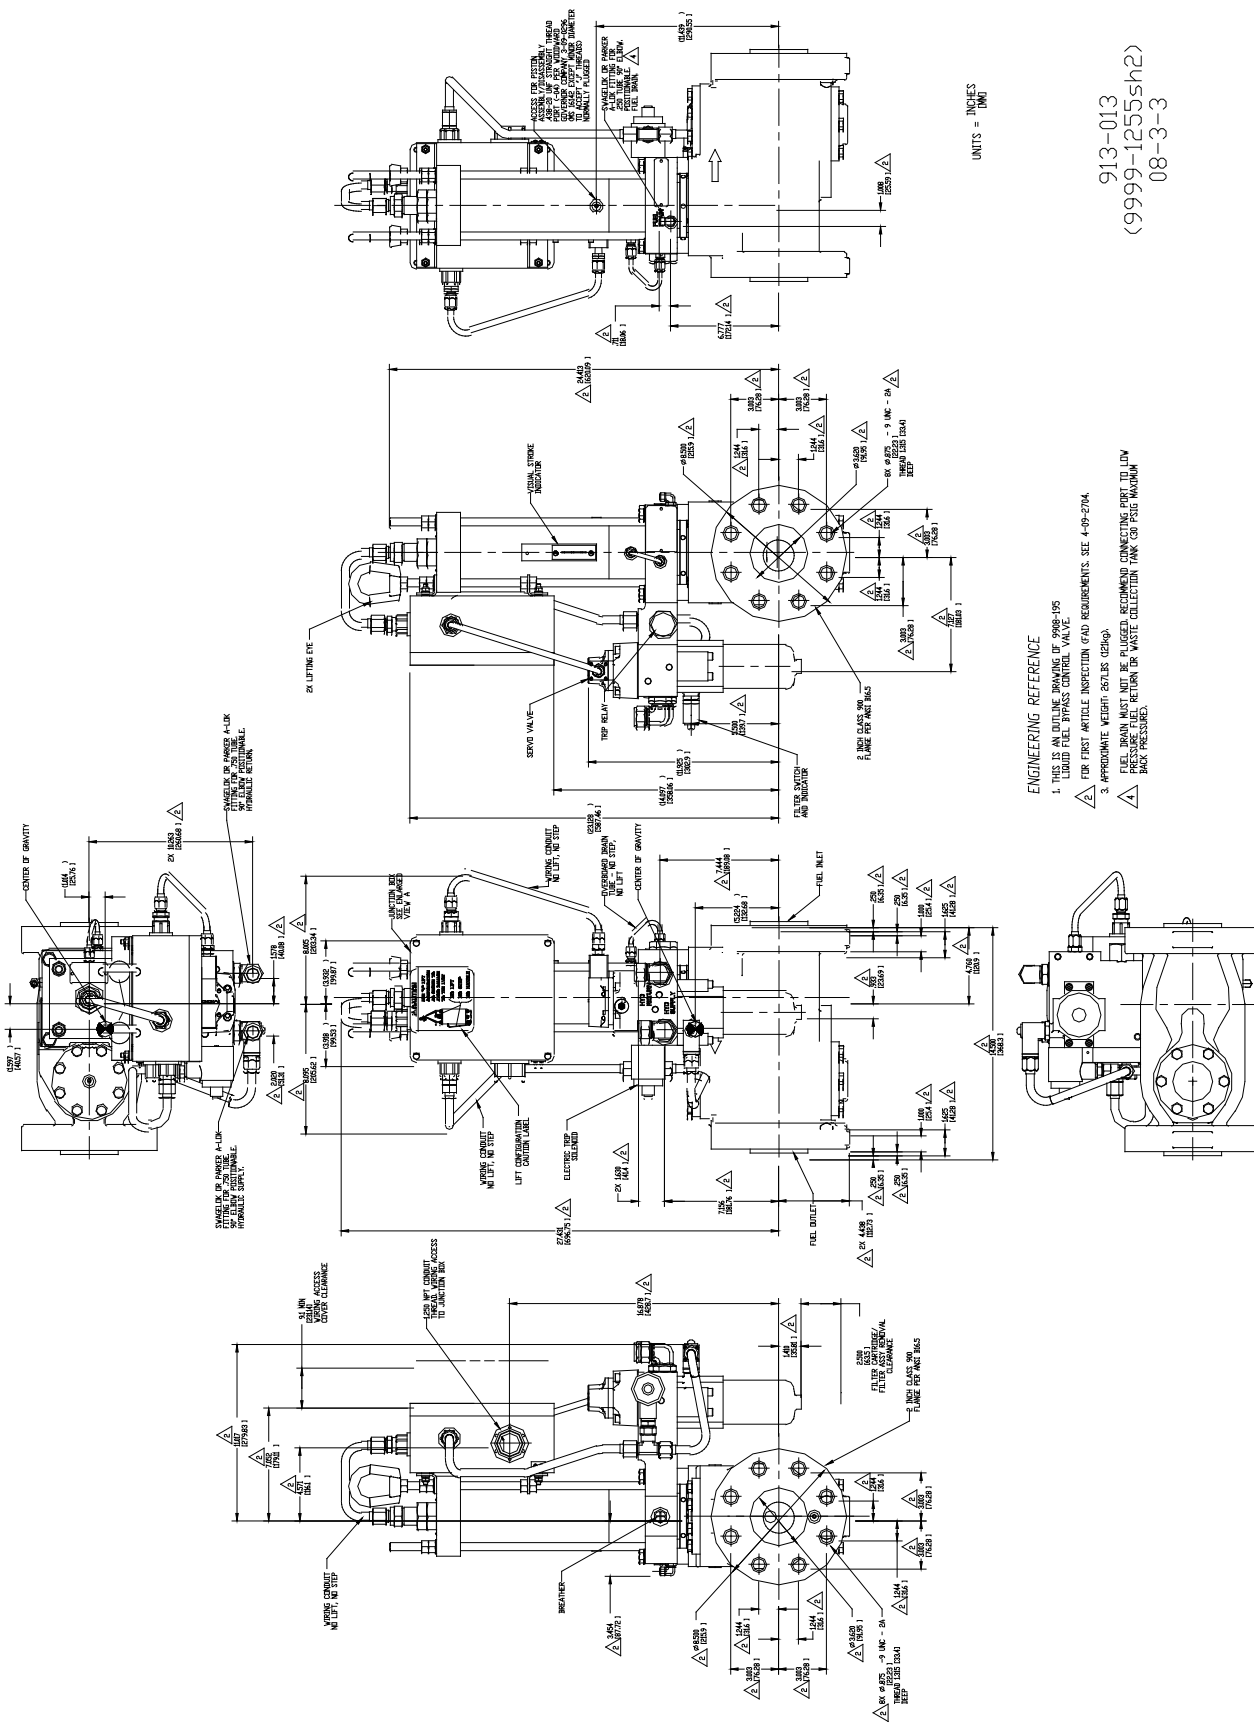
Outline Drawing, Liquid Fuel Bypass Valve (High-pressure Version)
